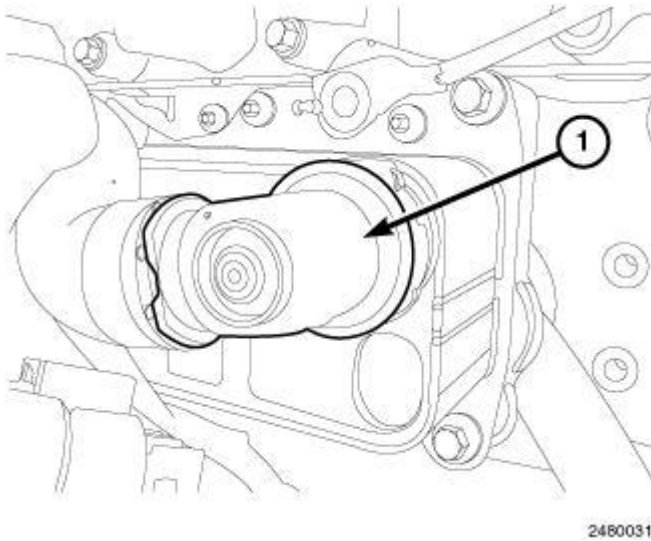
ECT Sensor Connector & Thermostat Housing Bolts
